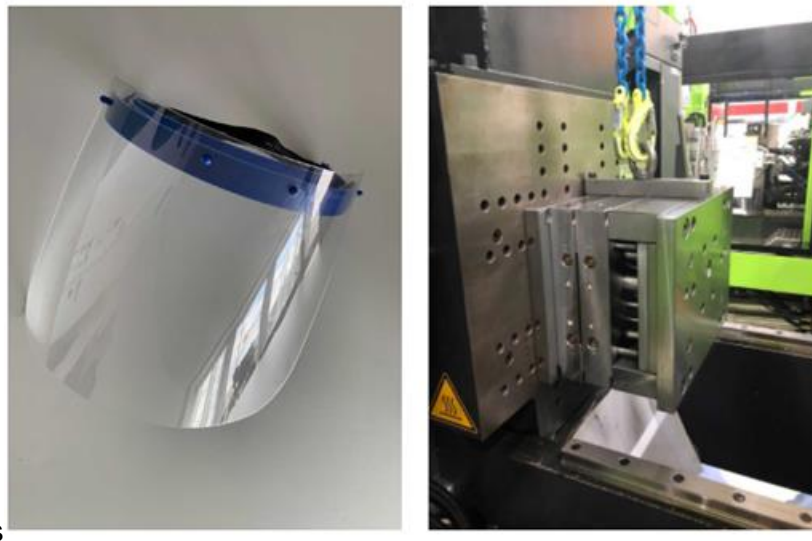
Plastic face shield (left) and injection moulding tool for production (right)
